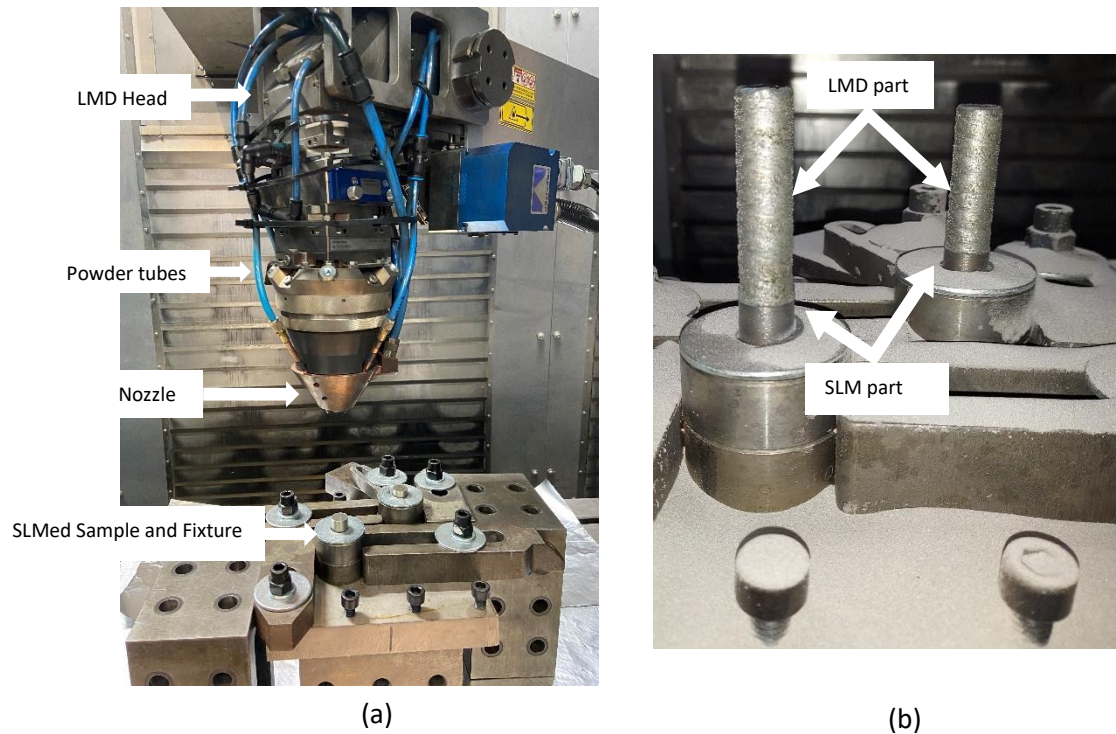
(a) Experimental setup used for LMD printing, (b) LMD printed parts.
